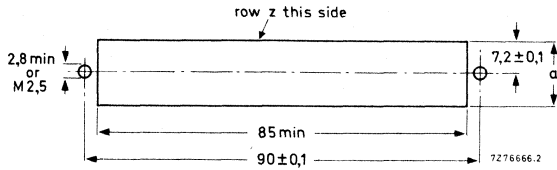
Panel cut-out; see Table 4 for dimension a.
